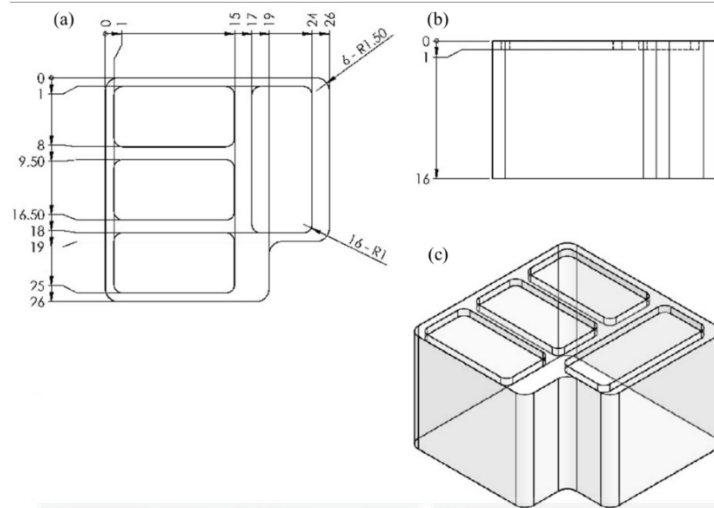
Dosimeter holder (D6): (a) Top view, (b) side view, (c) orthographic view
